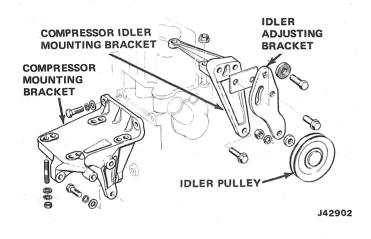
E-18 Compressor Mounting—49-State Six-Cylinder Engine
